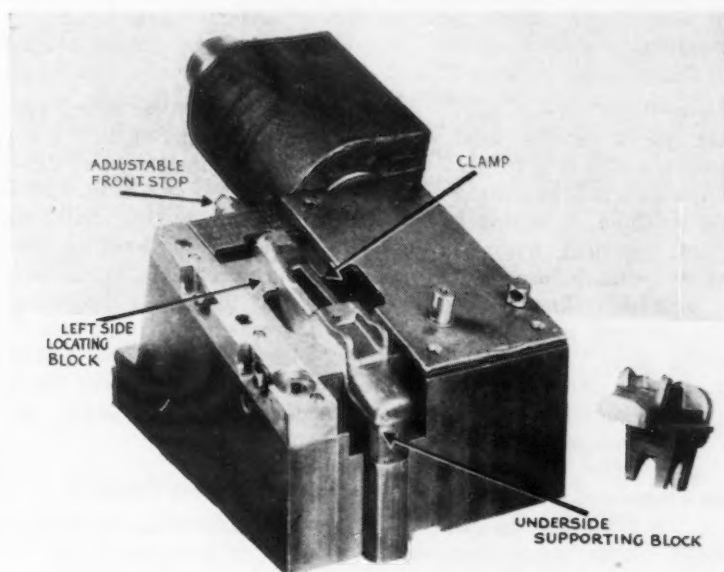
Oper. 116 consists of form broaching the rear end of the receiver.
